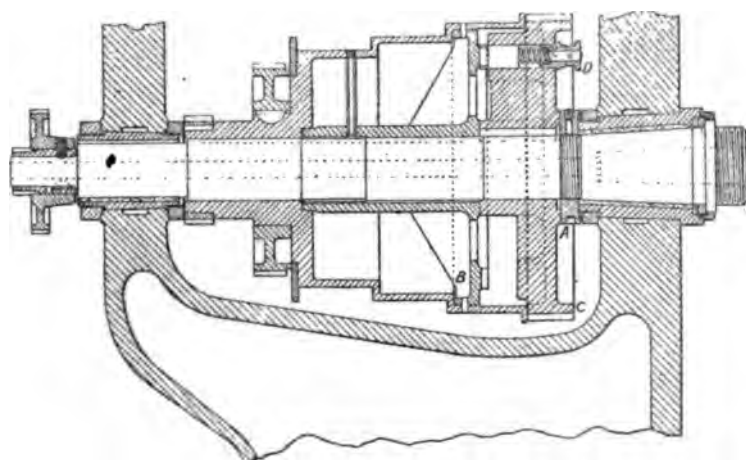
Headstock Spindle of Cincinnati Milling Machine.
